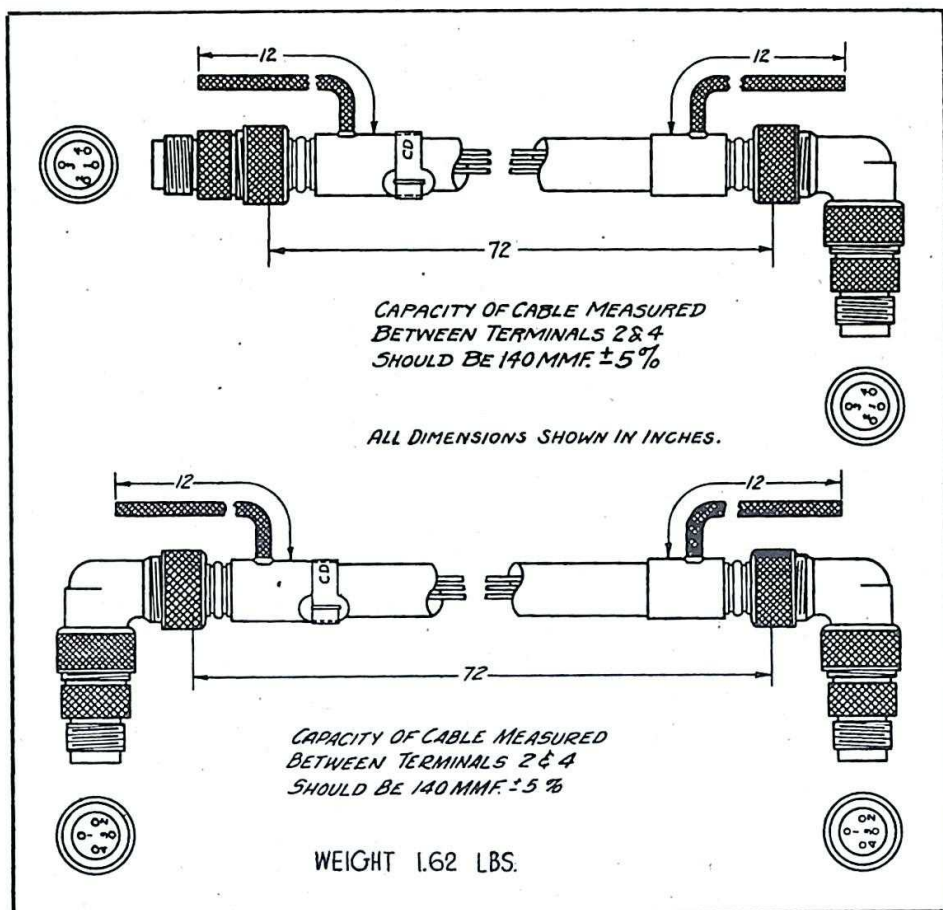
Cord CD-365 and CD-365-A—Outline Drawing
